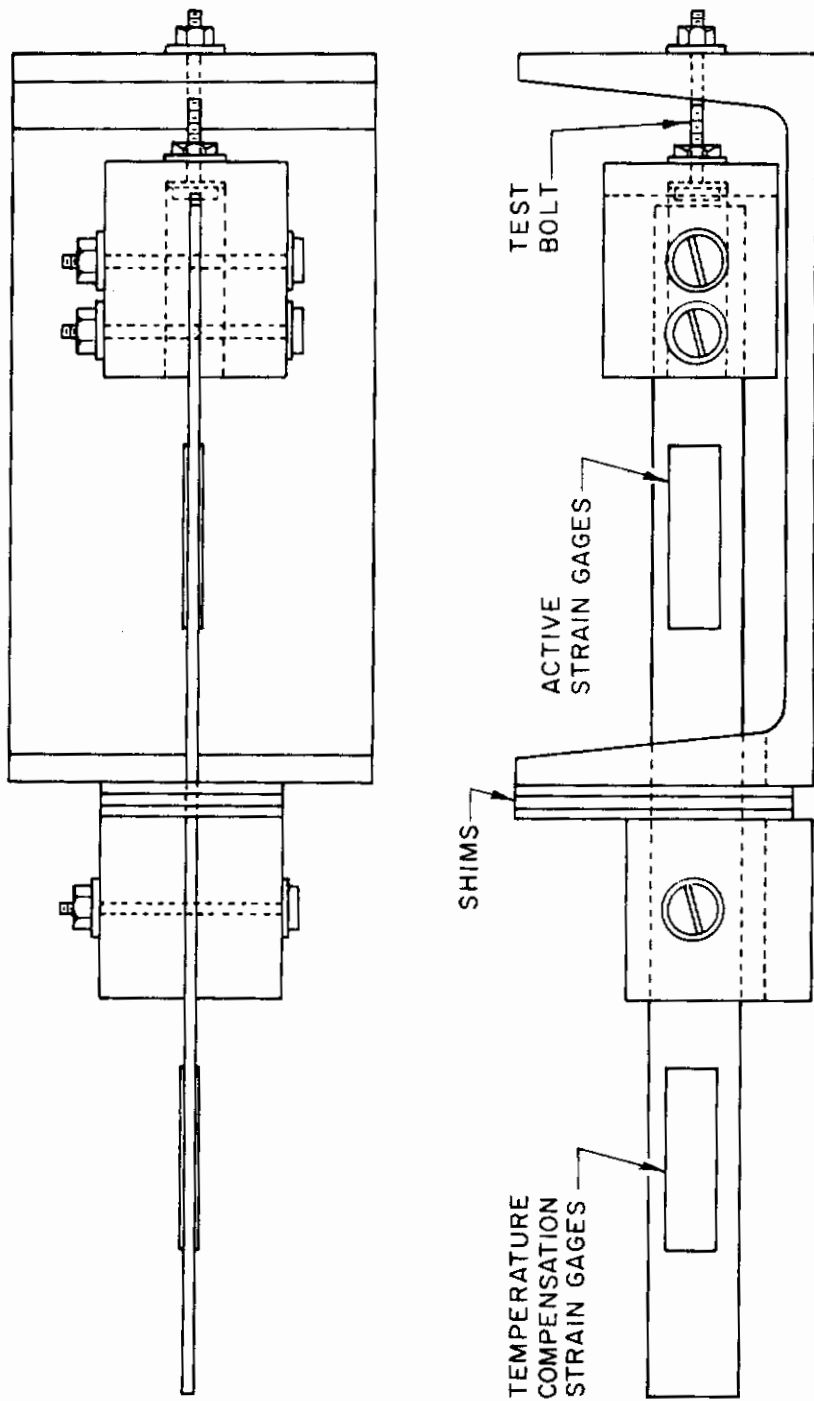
BOLT TORQUE - TENSION TEST JIG
